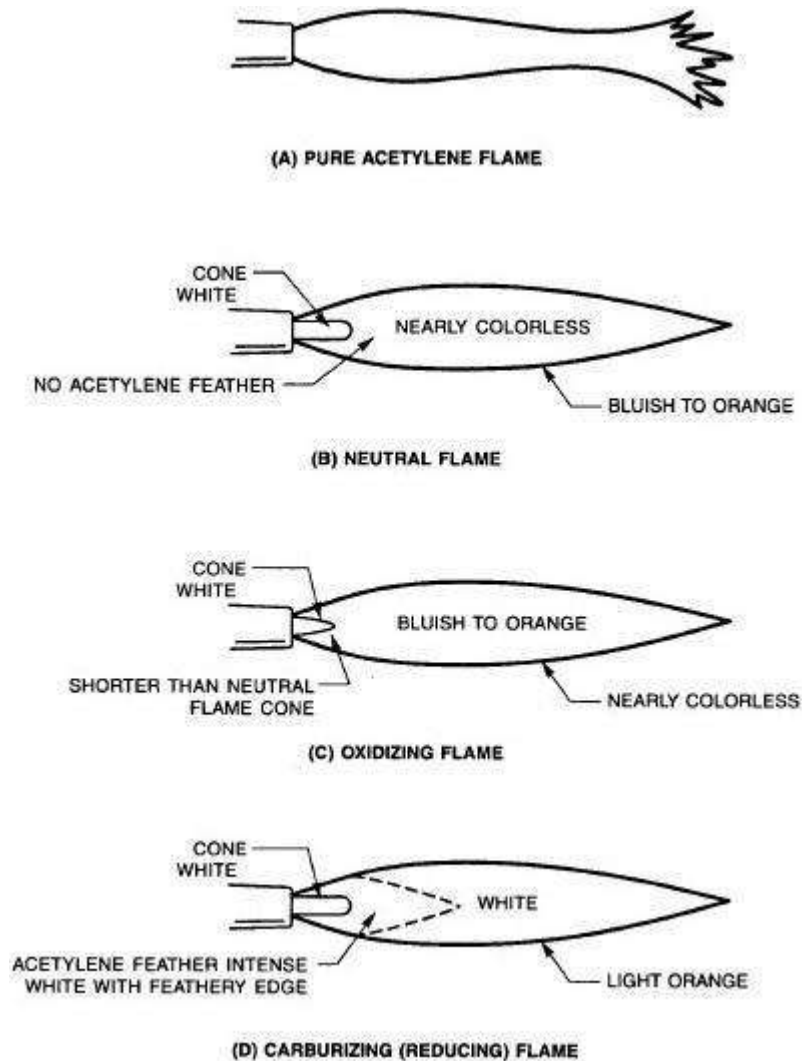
Oxy-acetylene flame (American Welding Society, 2001)
